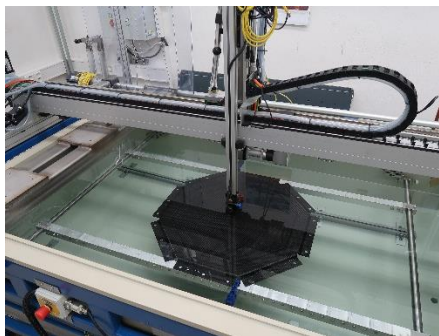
Example of C-scan inspection of flat test panel in VZLU immersion tank.
